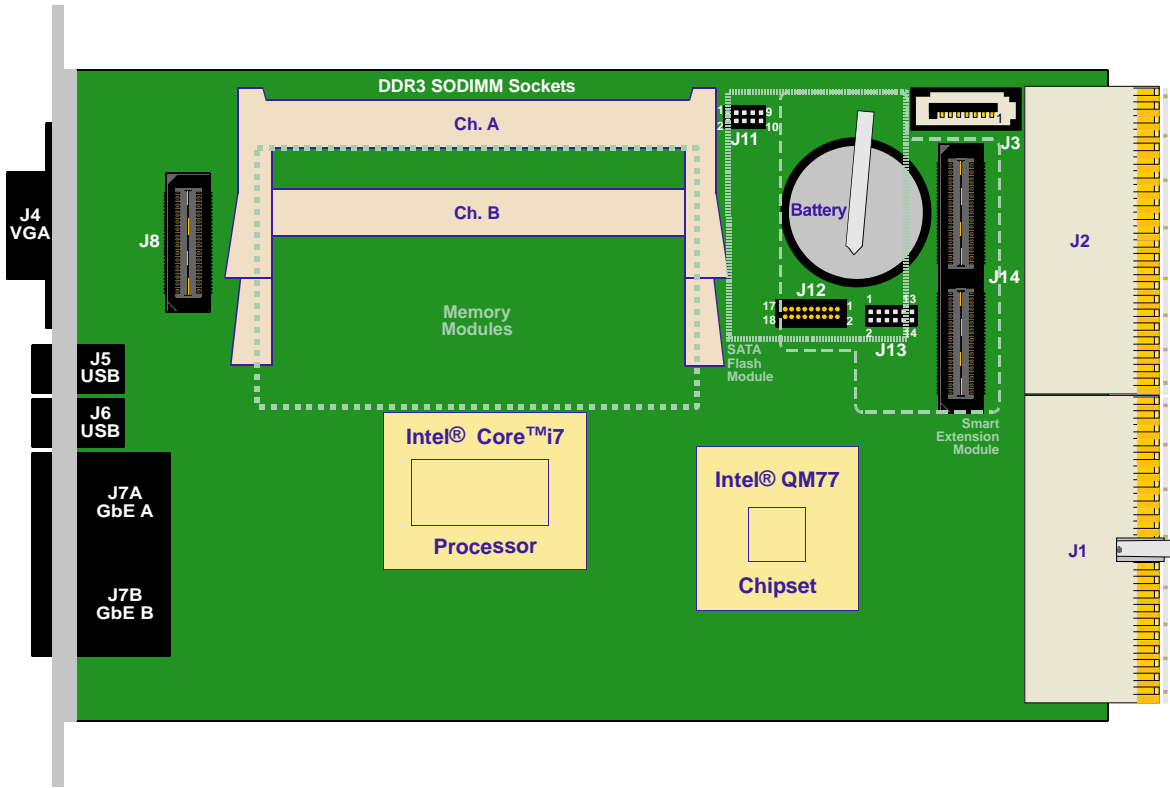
4 HP CP3003-SA Board Layout (Bottom View)
